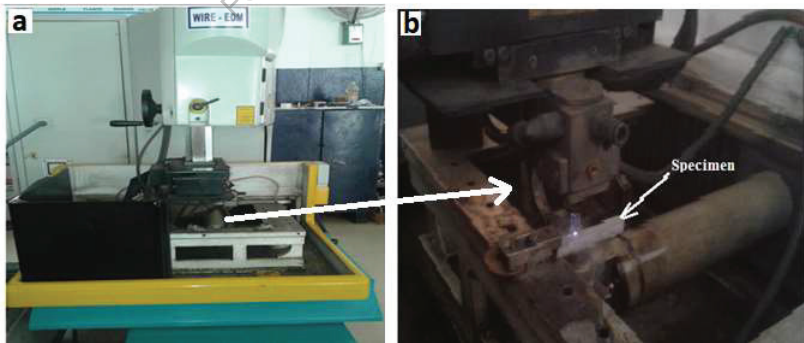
Experimental setup a) Wire EDM machine b) Detailed view
